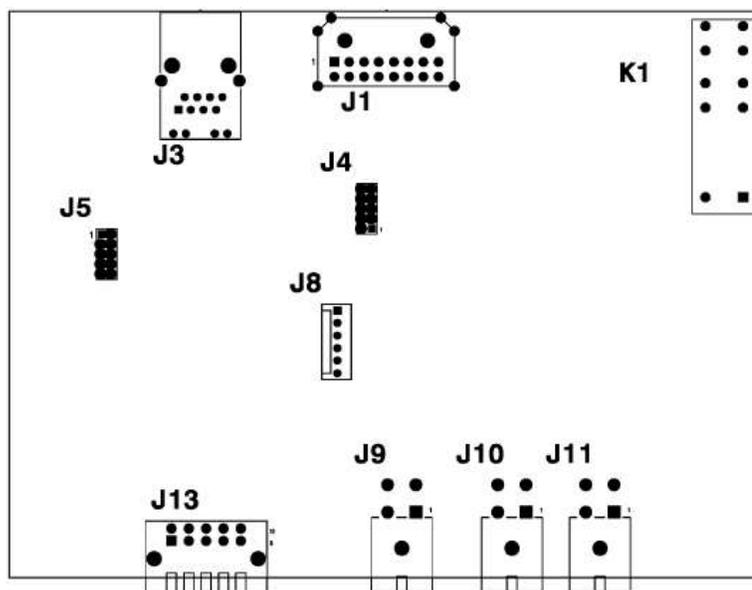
HEAT STICK CONTROL BOARD P/N 3-001997
